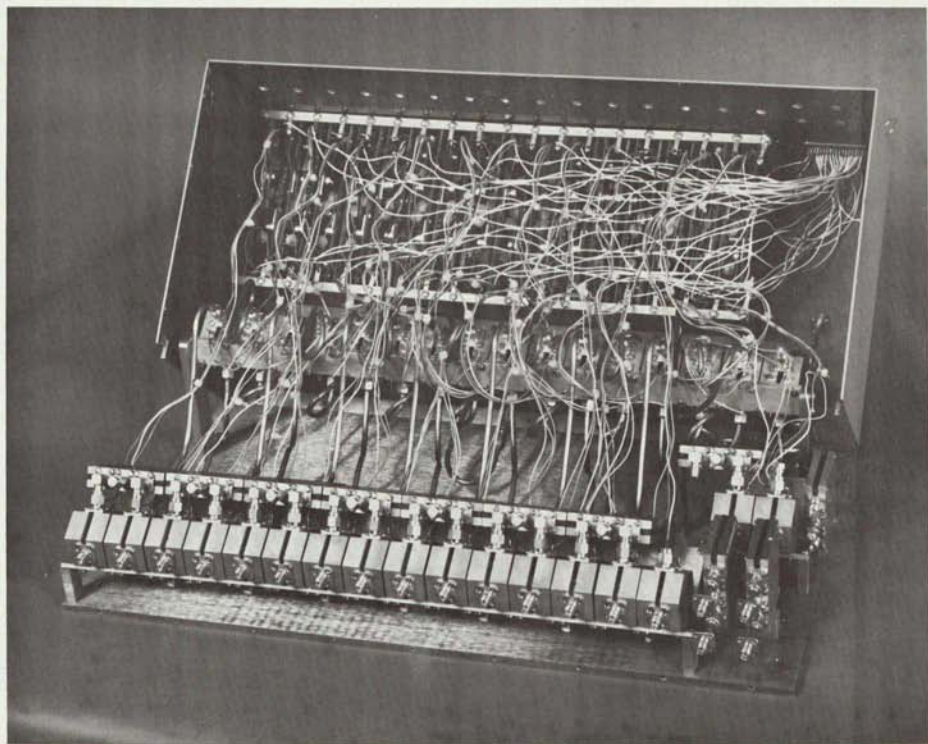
Photograph of the Completed Switch Assembly with Top Removed
